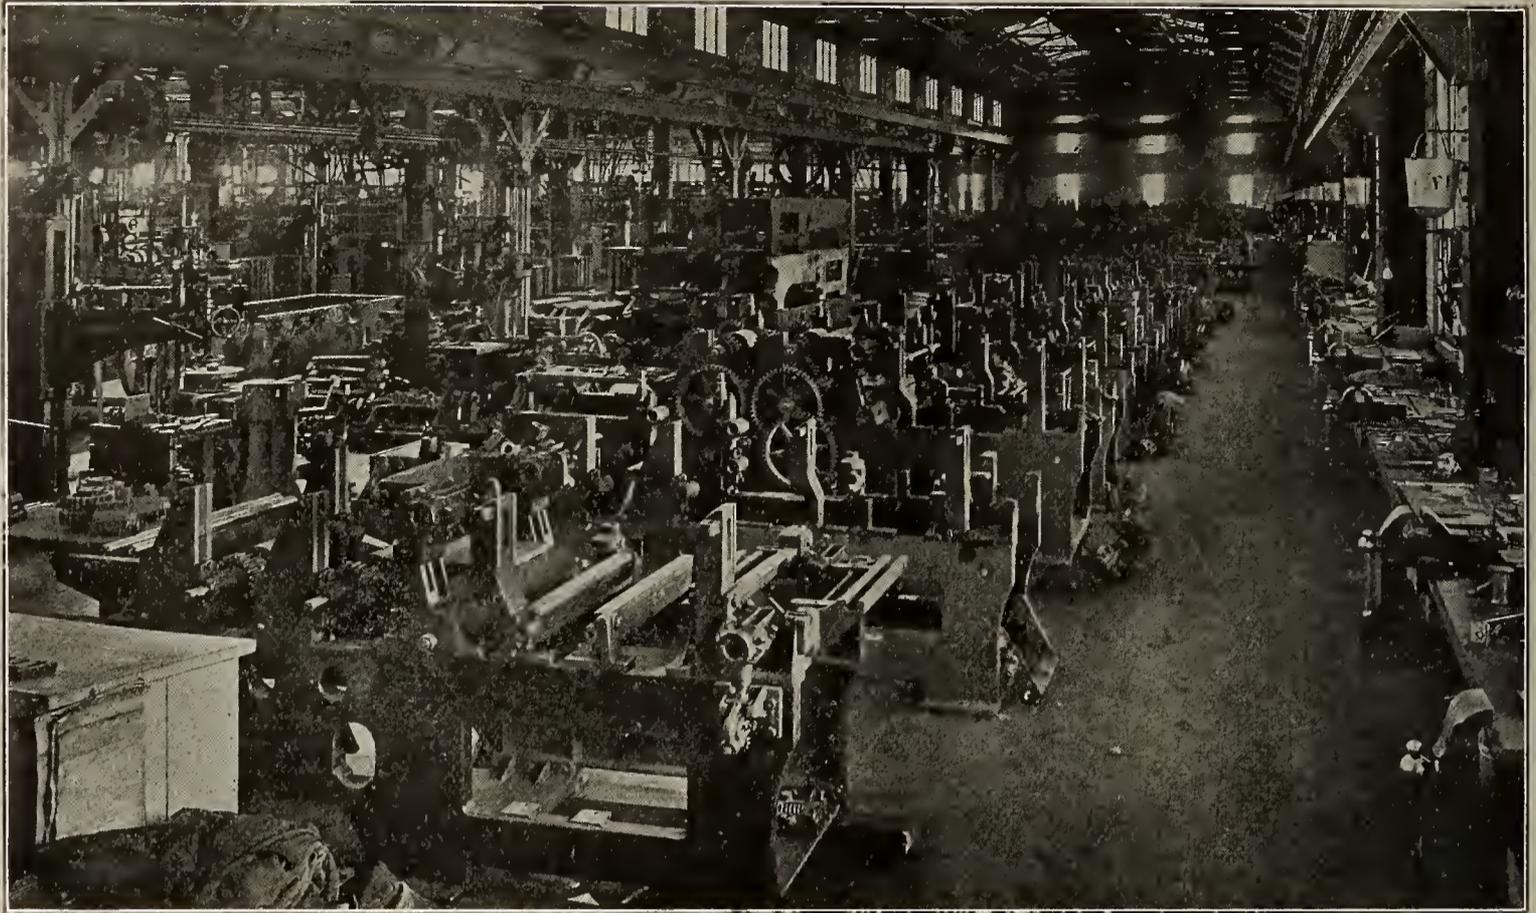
INSIDE MOULDER ERECTING FLOOR.
